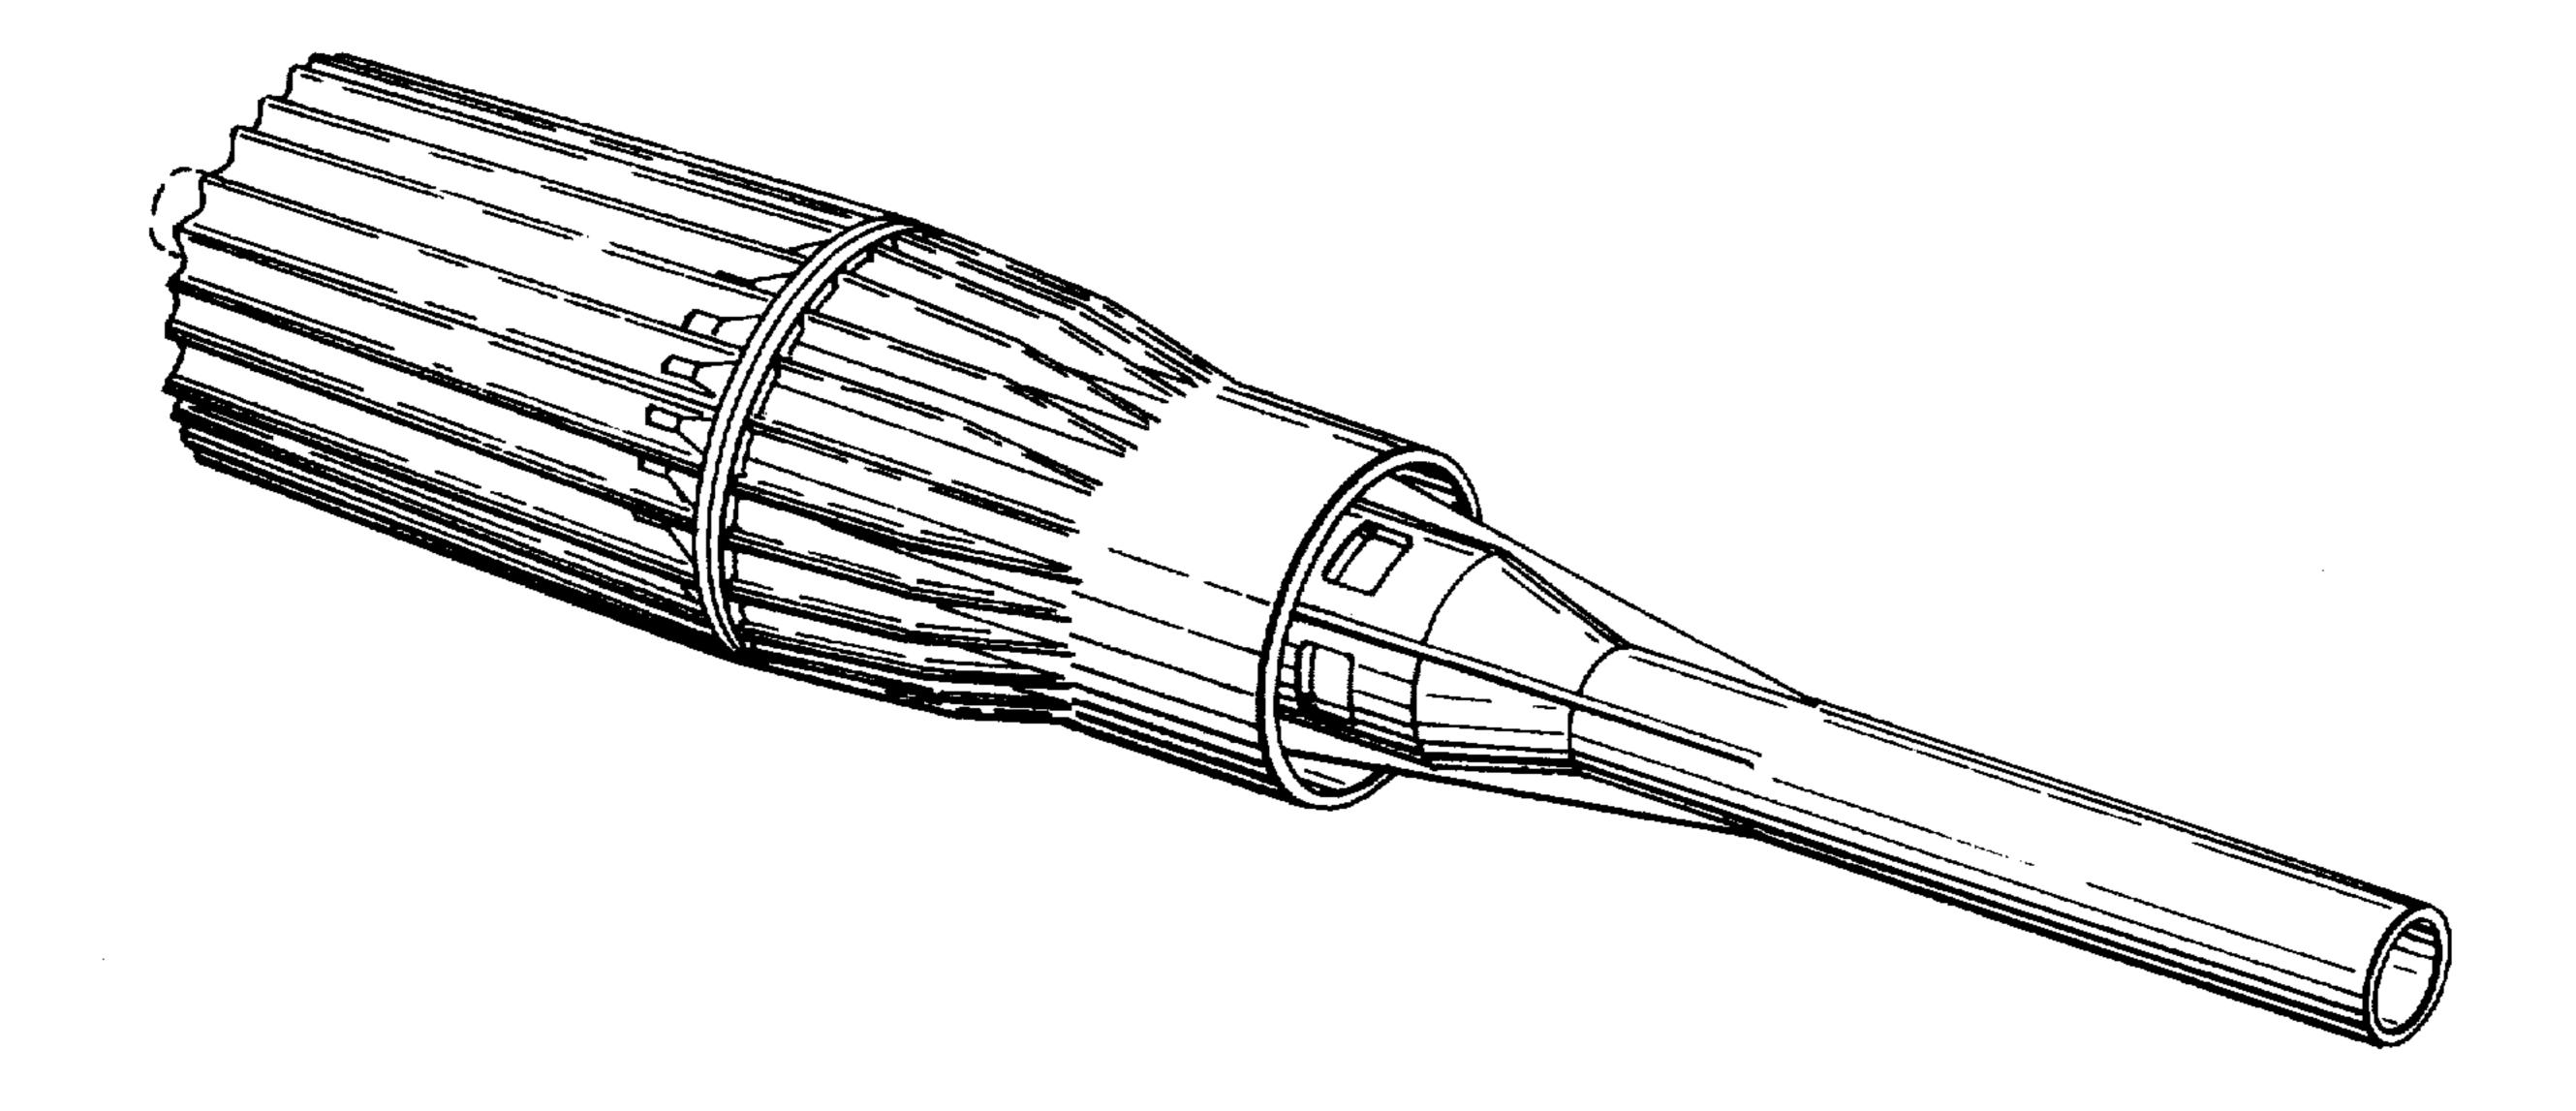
is a perspective view of the combined cartridge holder and nozzle assembly showing my new design; the broken lines are a conventional inlet hose connection forming no part of the present invention;
